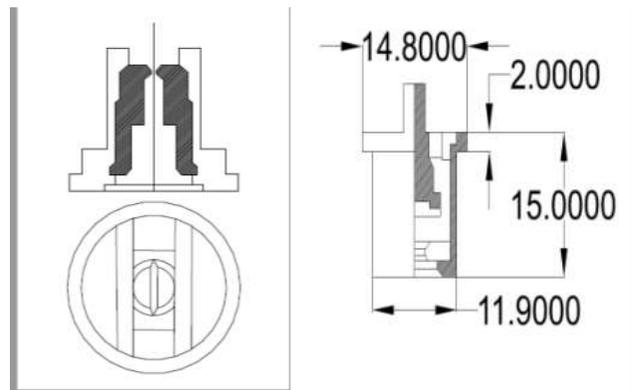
2-D views of spray nozzle flat fan and hollow cone
